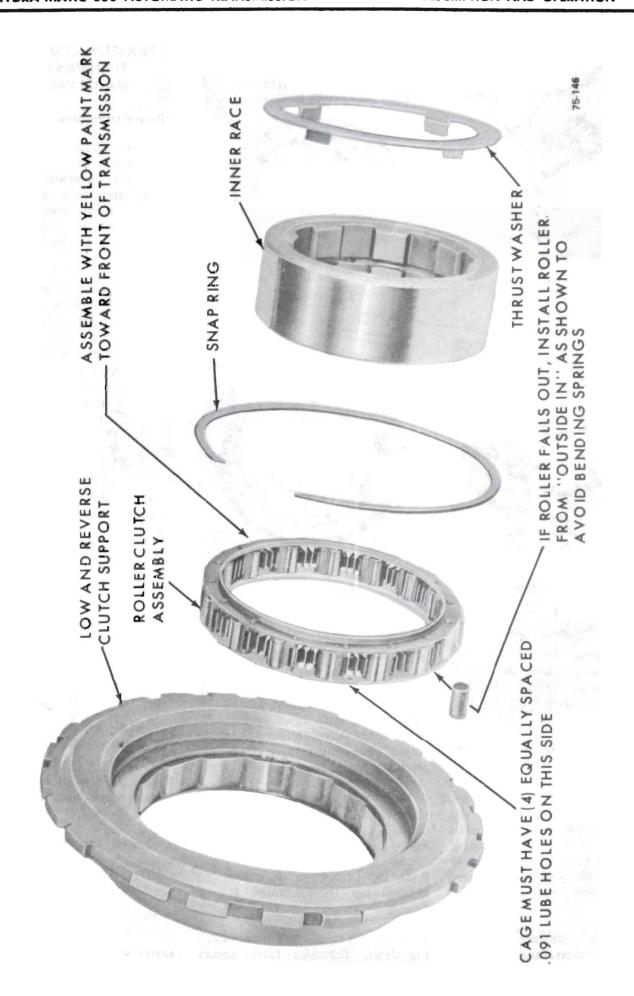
· Low and Reverse Clutch Support and Overrun Roller Clutch Assembly · Exploded View
